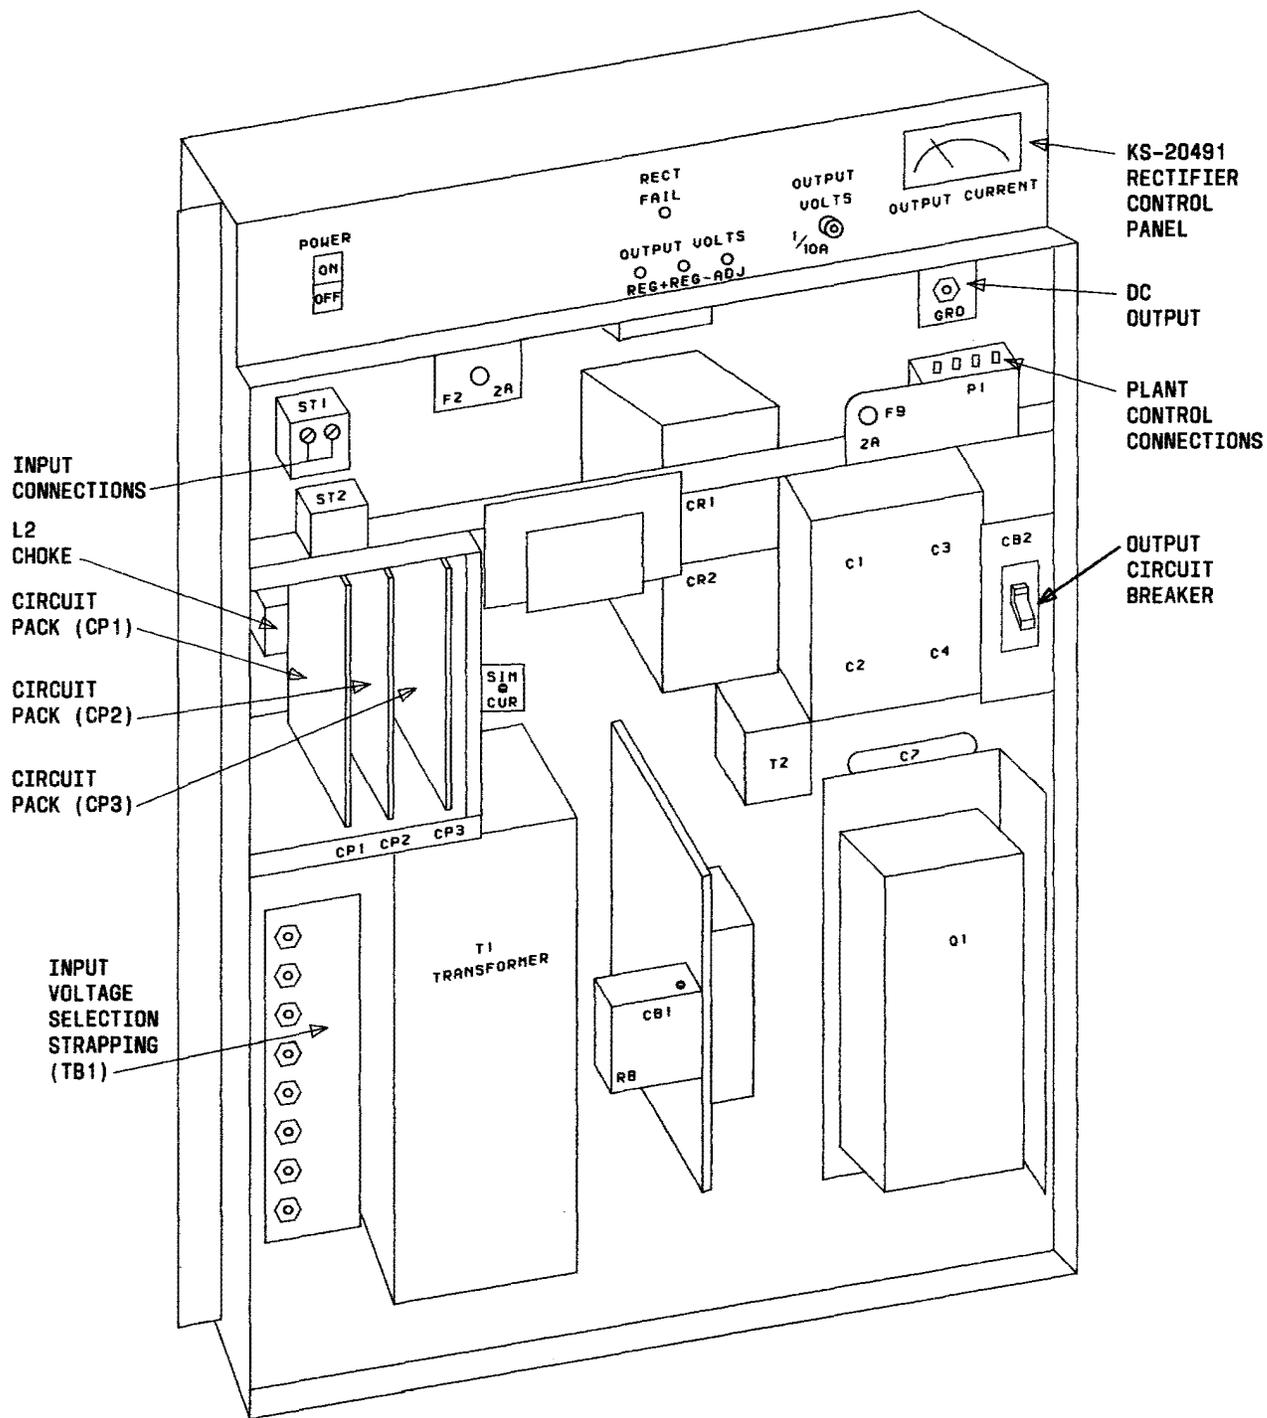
KS-20491 Rectifier (SD-82462-02)—Front Panel Removed
